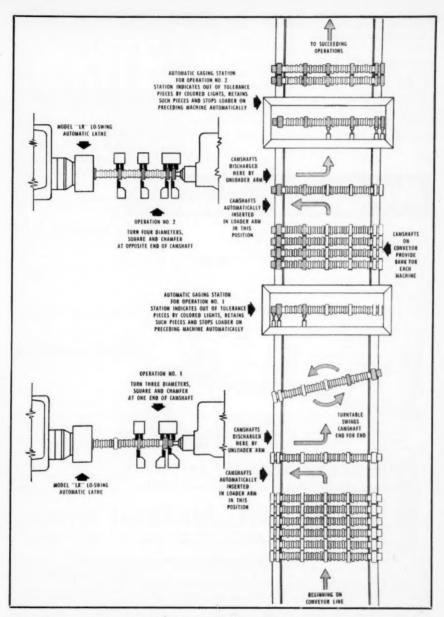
Diagram showing the flow of camshaft through the conveyors, automatic handling equipment, machines, turntable, and gaging stations.
